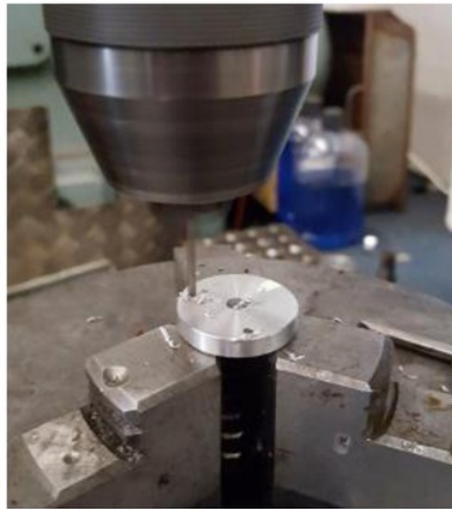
Drilling the pin holes by fixing the coupling with three jaws.
